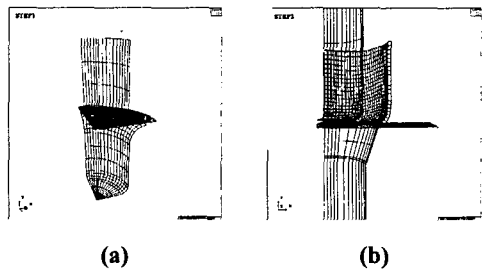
The FE model for the simulation of deep drawing (a) the first deep drawing (b) the second seep drawing
